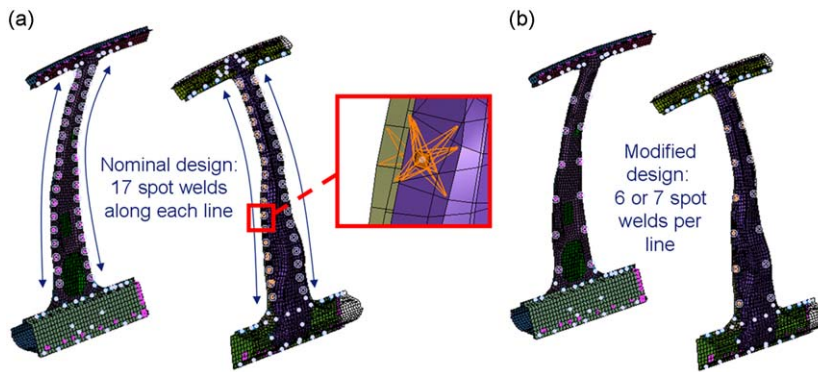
Vehicle B-pillar case: modification of spot weld layout from the nominal design (a) to a modified design with a sparse spot weld density (b).
